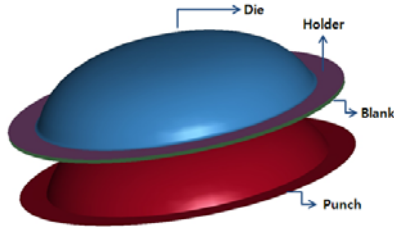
Modeling of Die, Holder, Punch and Blank using Dyna-Form
